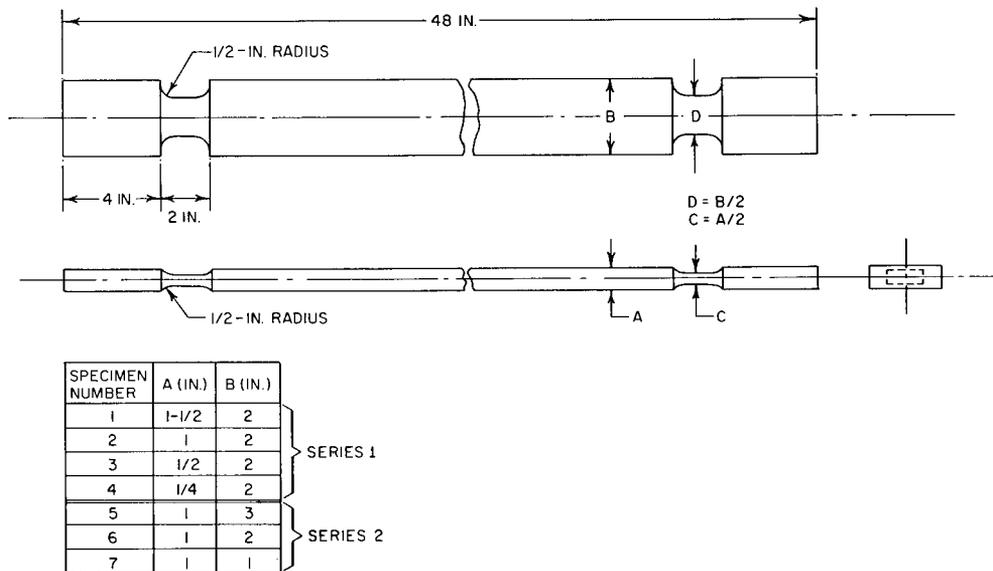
Specimen design. Prior to test plastic flow was initiated in the reduced end sections to eliminate the machine induced bending moments caused by deflection of the machine head under load.
